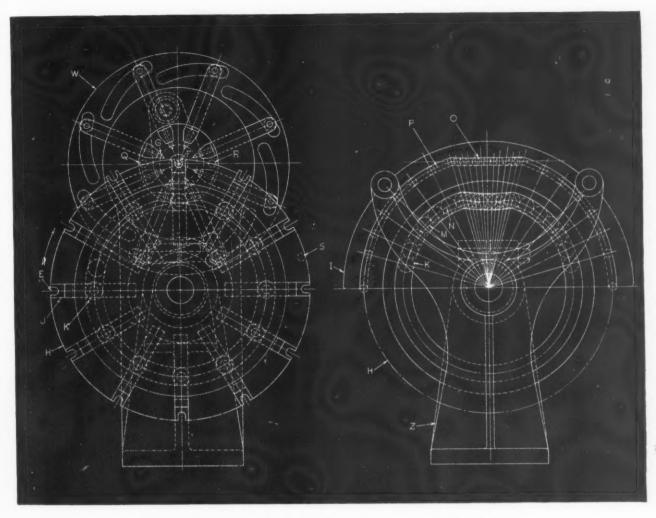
(Left) End View of Indenting Punch and Dial Feed Shown in Fig. 1 Fig. 3. (Right) Diagrammatic Lay-out of Cam L and Bracket Z, Fig. 1
